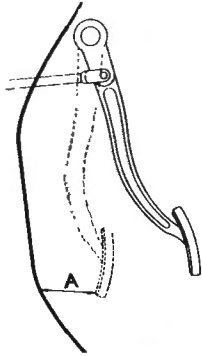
Minimum pedal to toe-board dimension - models 1967 - 68
